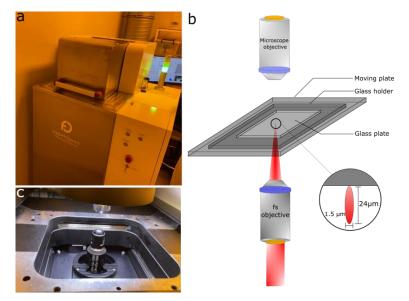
Picture of the Femtoprint machine from the outside (a), Sketch of the operating principle showing the glass substrate placed on a holder fixed on the moving stage and located above the laser objective (b), Picture showing laser objective located at the bottom and the microscope objective at the top used to calibrate the position and orientation of the glass substrate (c).
